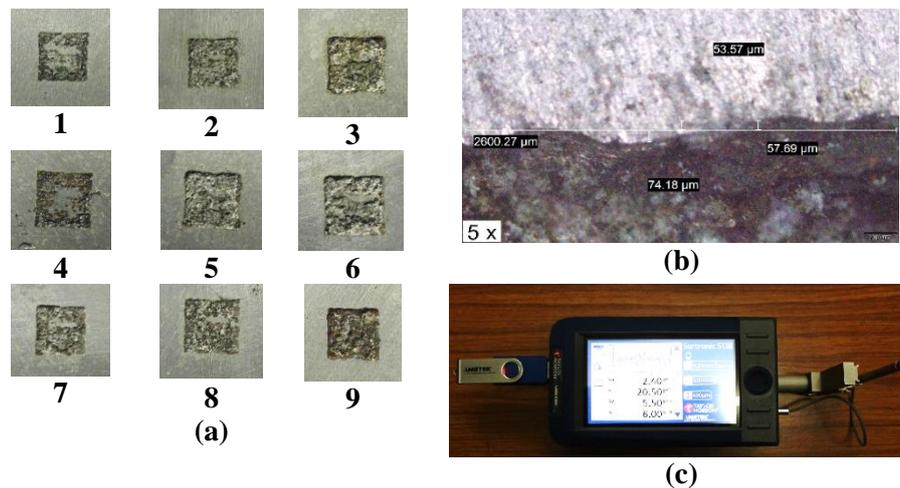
(a) Photo chemically machined sample specimen (b) Edge deviation measurement (c) Measurement of surface roughness
